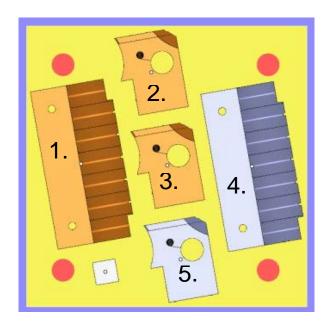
3D printing placement of the heated cutters. Pieces 1 to 3 without machining margins and the 0.2 mm machining margin added to the edges of pieces 4 to 5.
